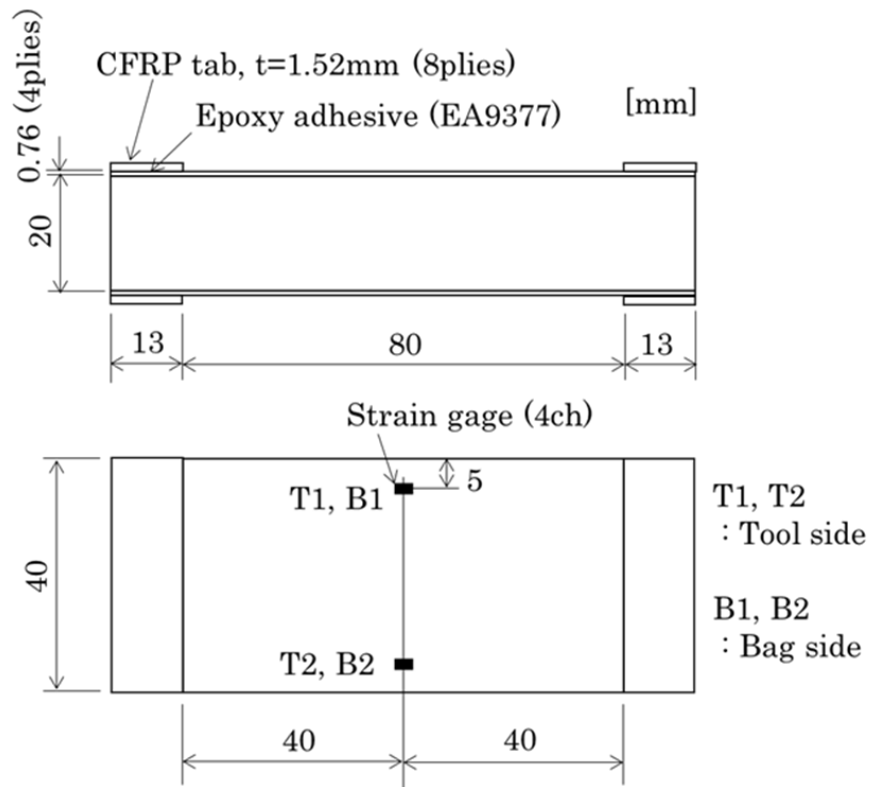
Dimensions of Edgewise compression test specimen
